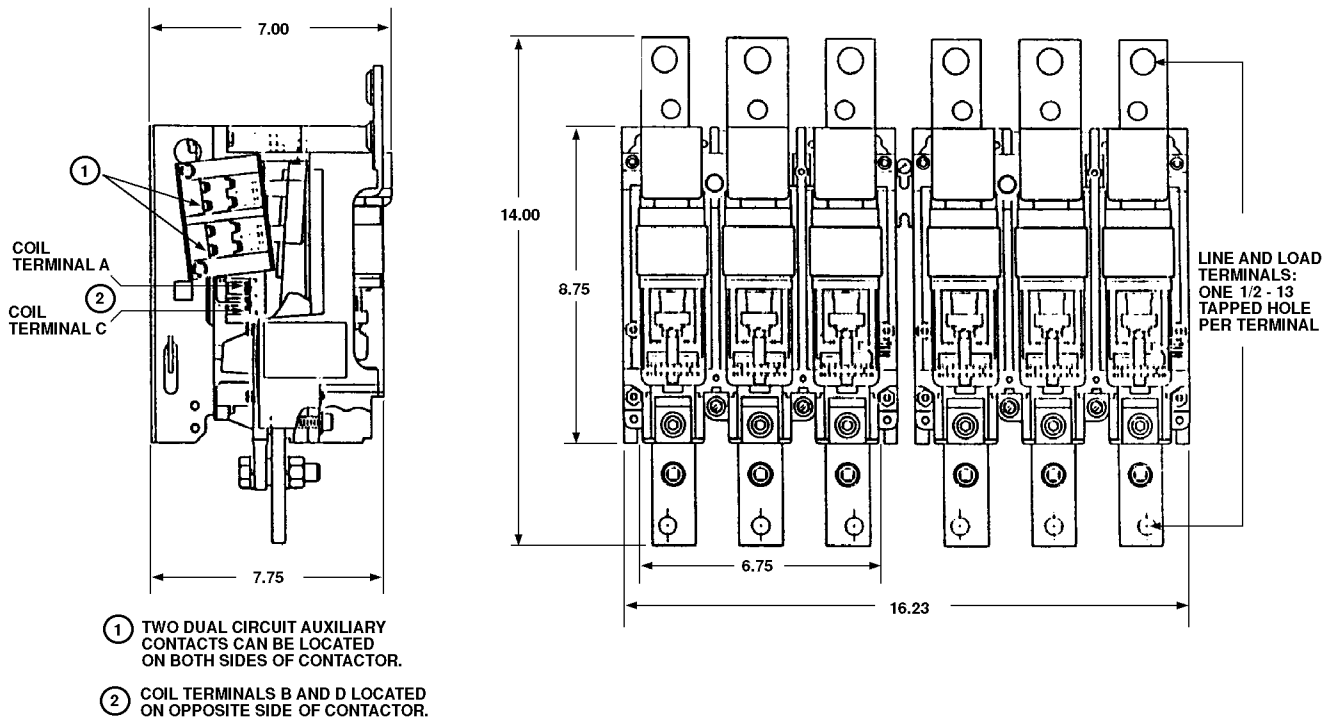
Dimensional Drawing (Inches), Class 8502/8702 Type WHO
